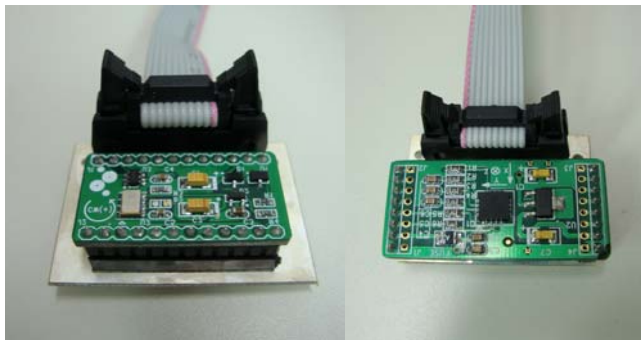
Gyroscope and triaxial accelerometer assembled in circuit board with cables connector
